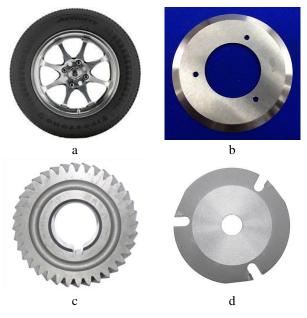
Examples of circular elements: a - car tire; b - flange; c - gear; d - blade
